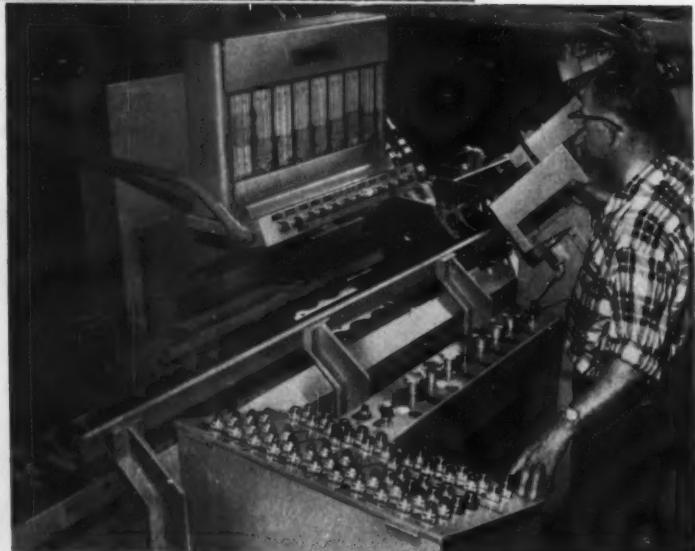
(Right) Automatic inspection and classifying machine checks bore sizes and stamps them for selective assembly with pistons.
